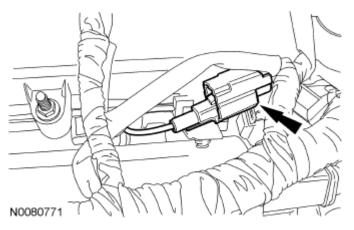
Locating Radio Capacitor Electrical Connector Courtesy of FORD MOTOR CO.
